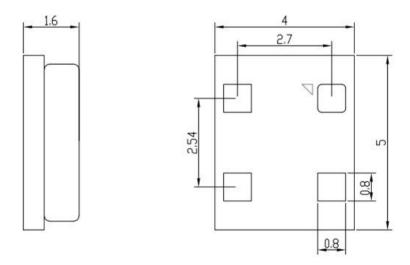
AGS10ET dimension (unit: mm, general tolerances: ISO2768-mK)
